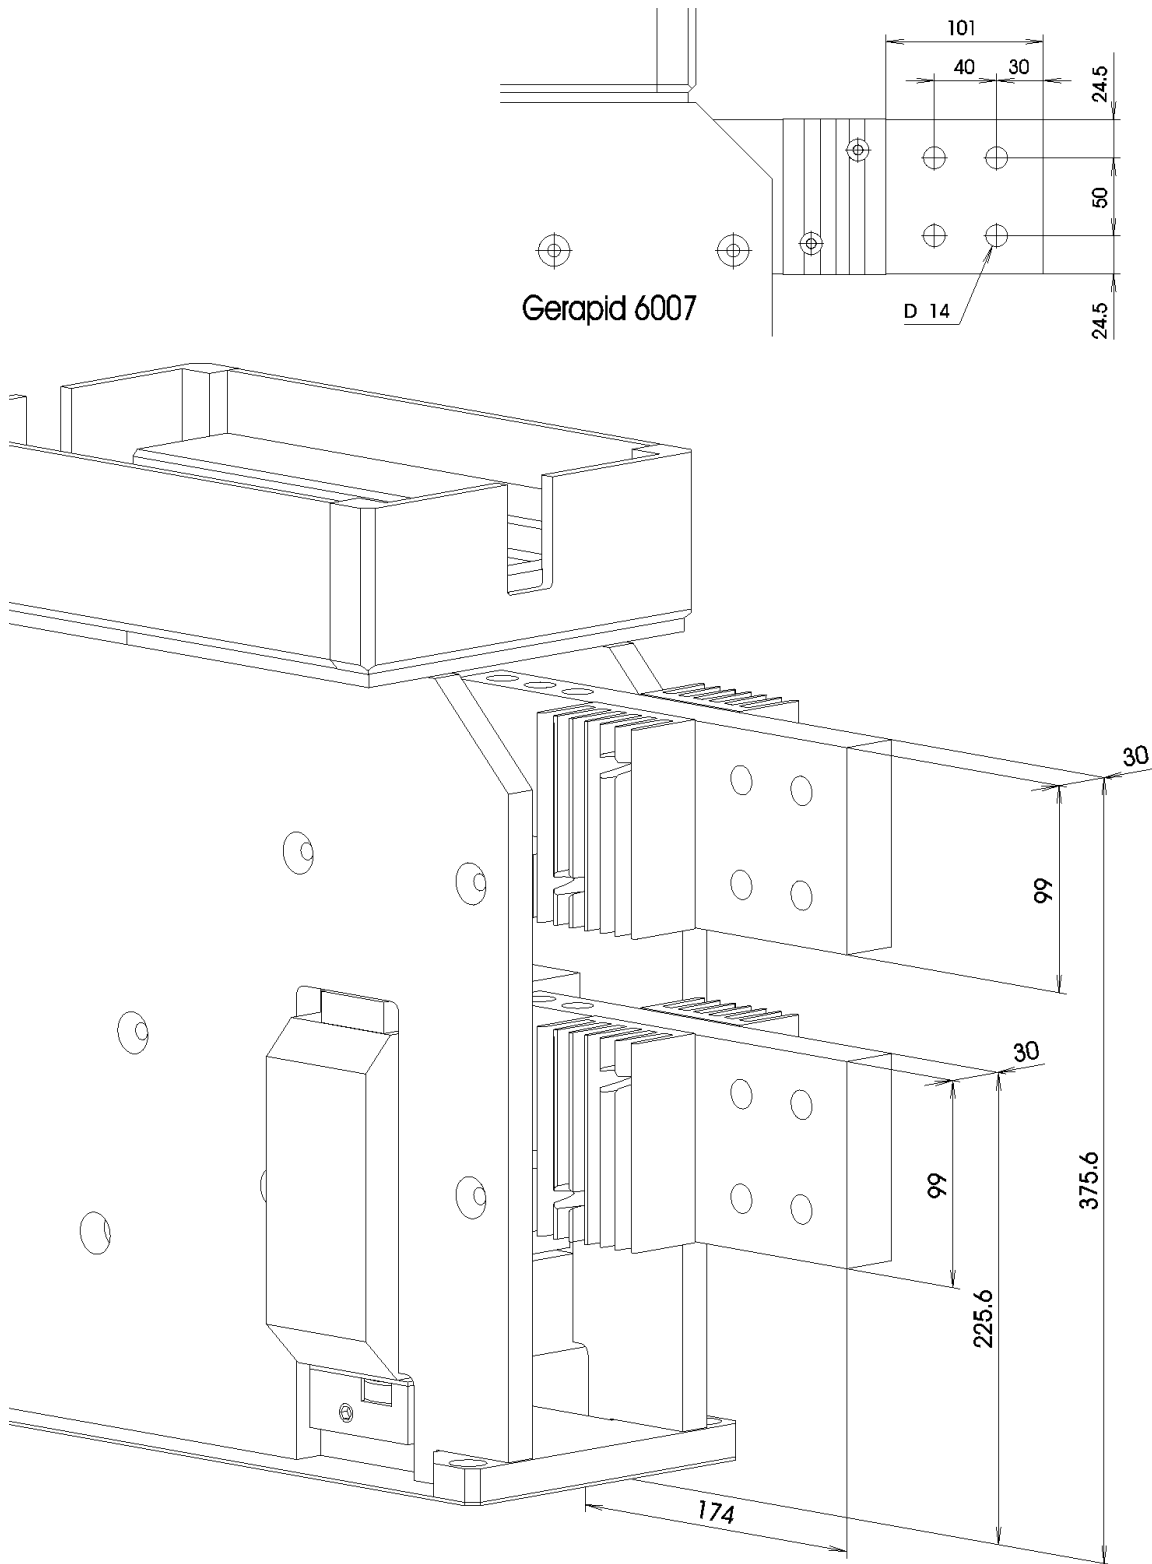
Gerapid 6007, connections vertical only (Dimensions in mm)
